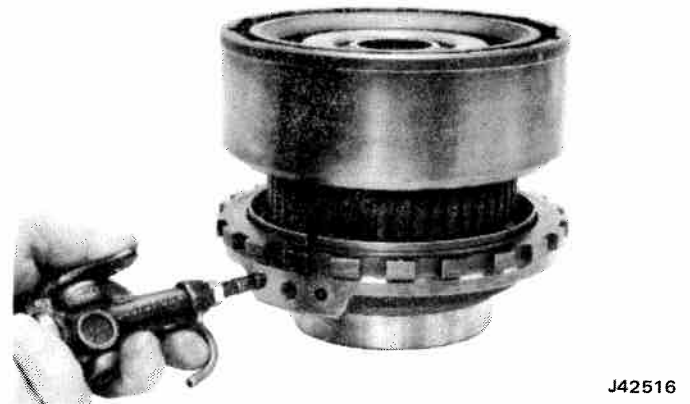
Checking Operation of Direct Clutch Assembly
